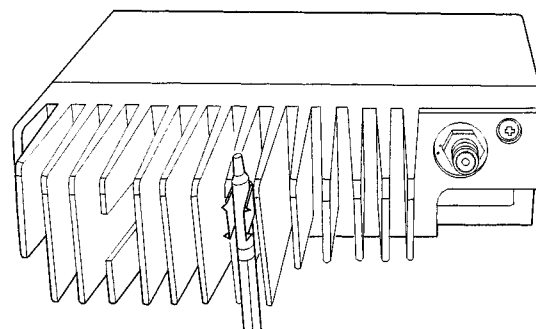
Insert thermal Switch into R1225 Heatsink
